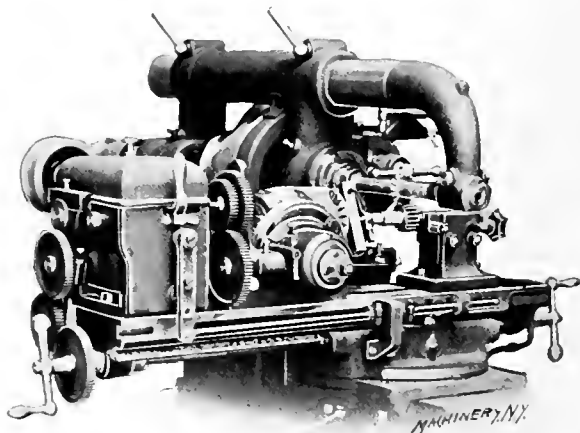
Attachment made by Ludwig, Loewe & Co. for converting the Milling Machine into an Automatic Gear Cutter.
